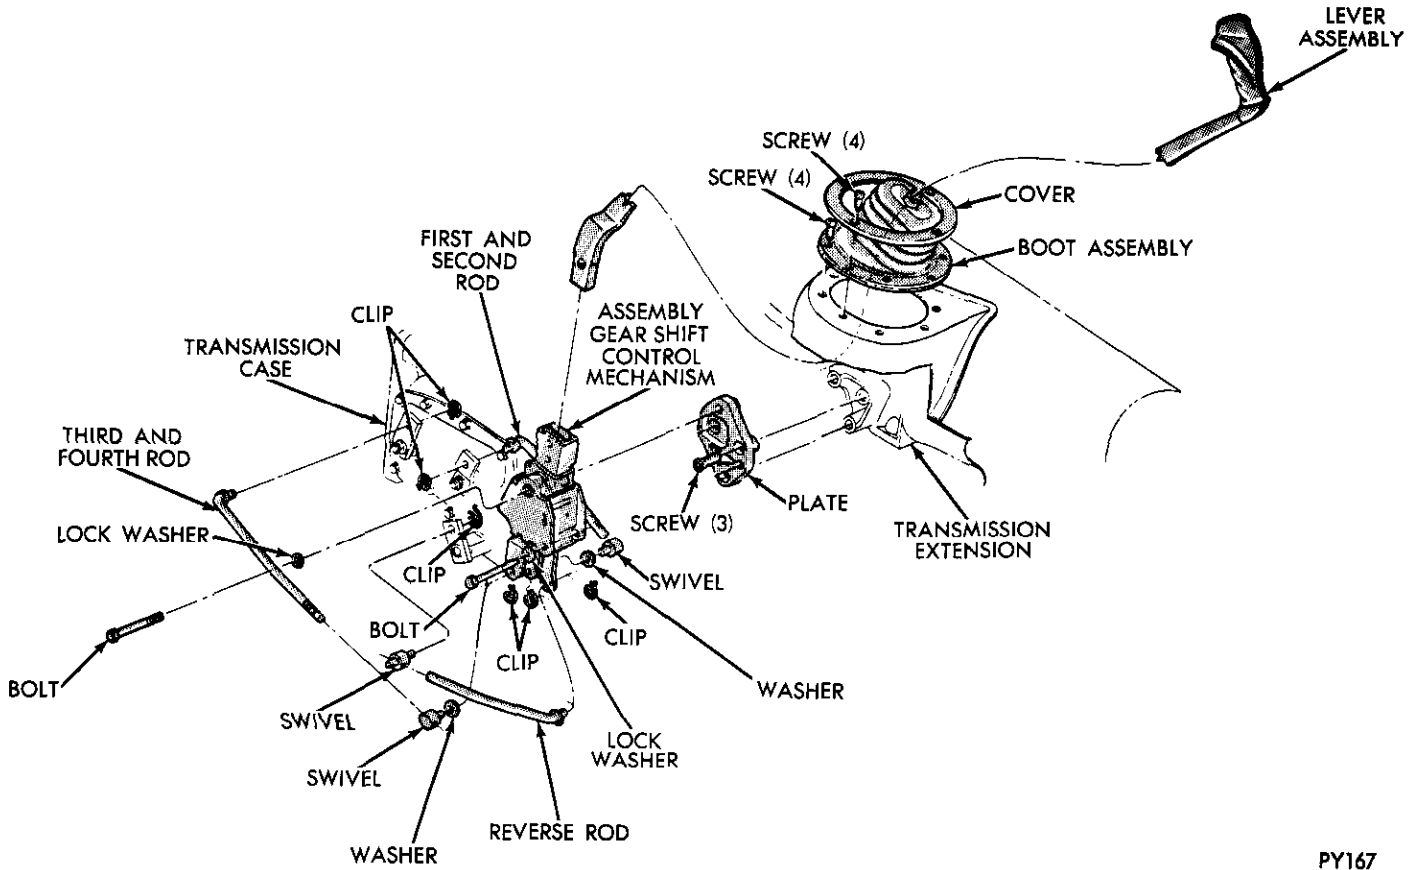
Gearshift Mechanism—Disassembled (Coronet-Charger)
